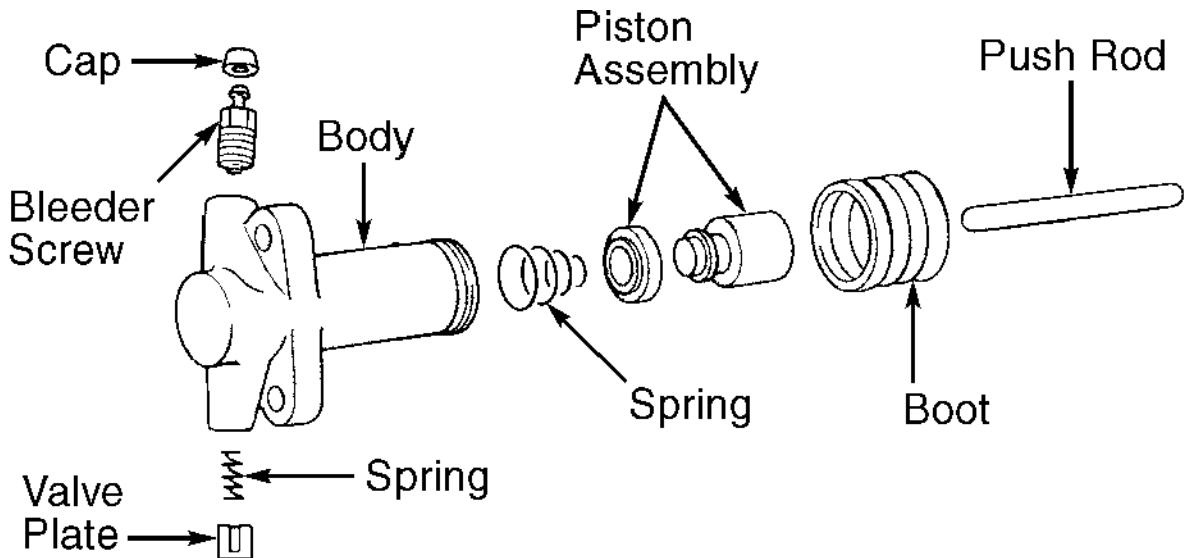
Exploded View Of Clutch Release Cylinder (Typical)
